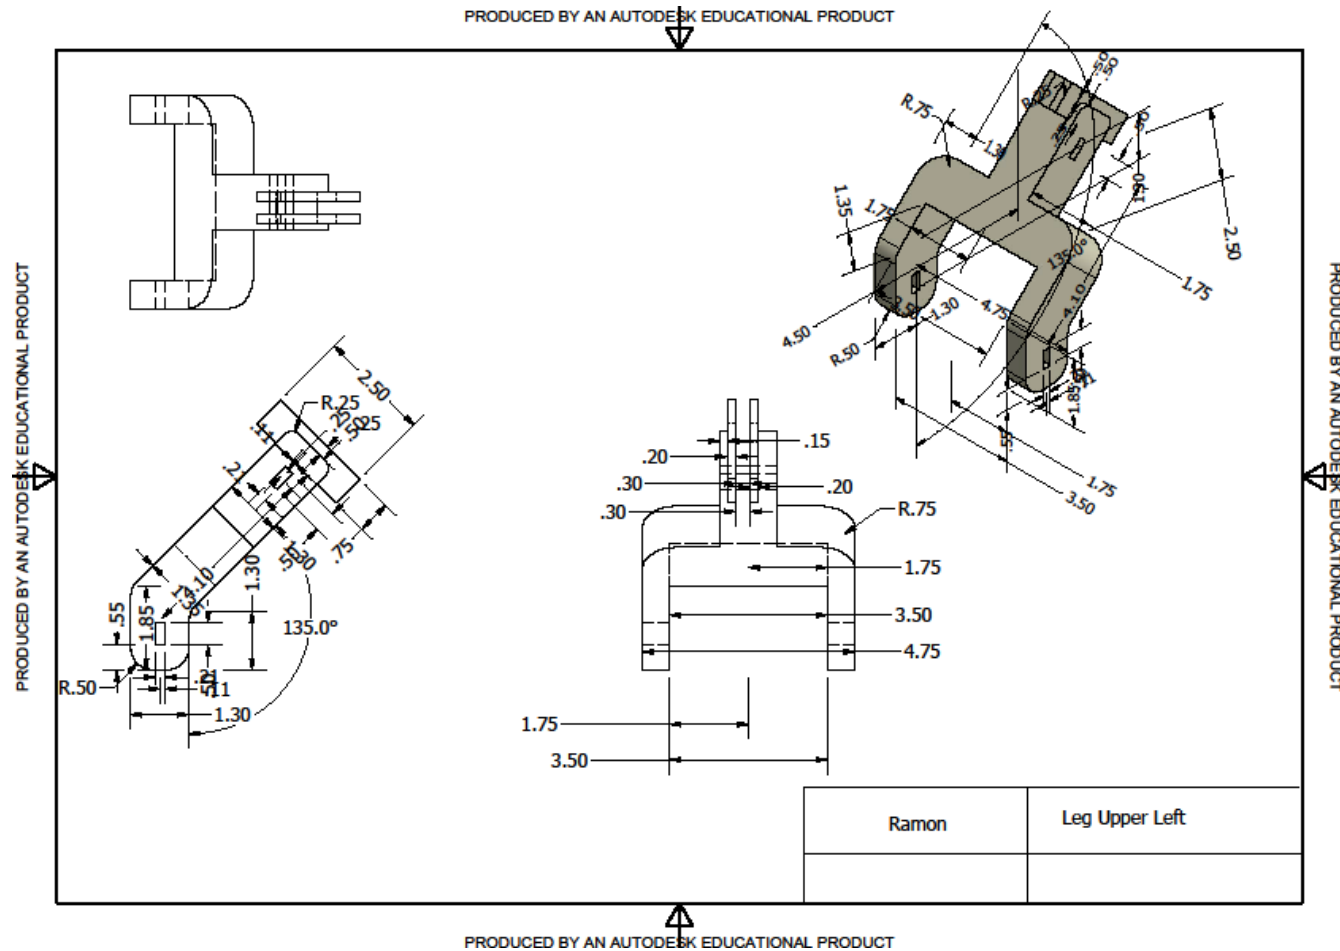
CAD drawing of the Upper Left Leg of the 6-DOF sensor.
